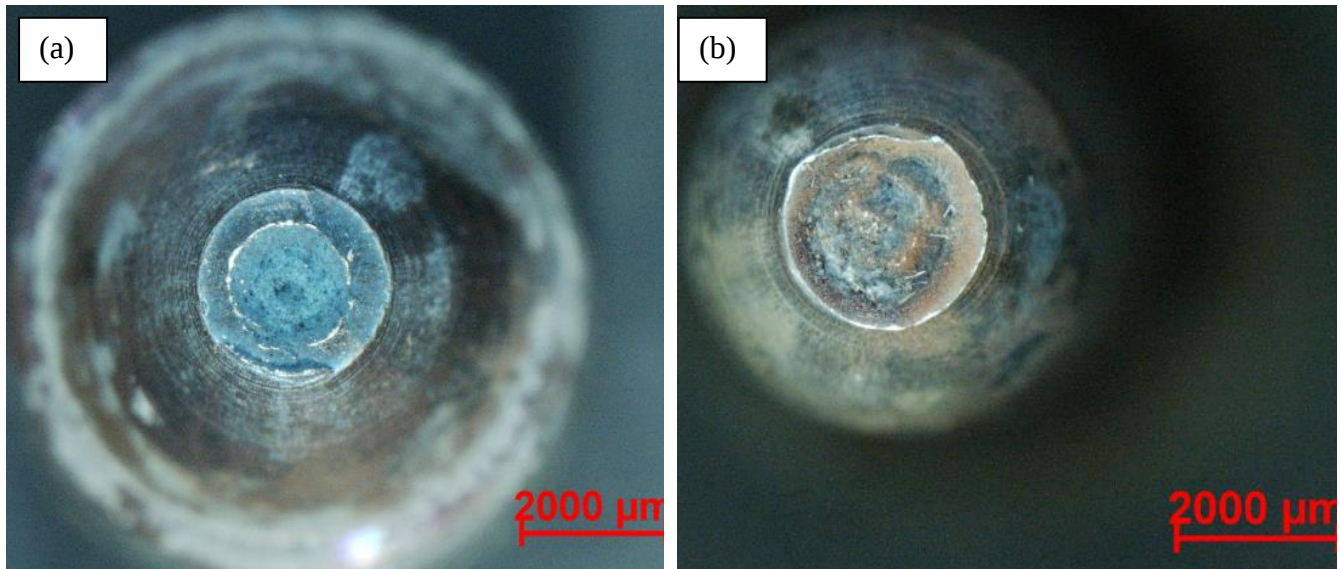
Fracture surface stereo image of the 500°C hot tensile tested specimen showing cup and cone shape with dull (greyish) colour appearance (a) Fractured half sample (towards X20 PM side, (b) Fractured half sample (towards P91 PM side).
